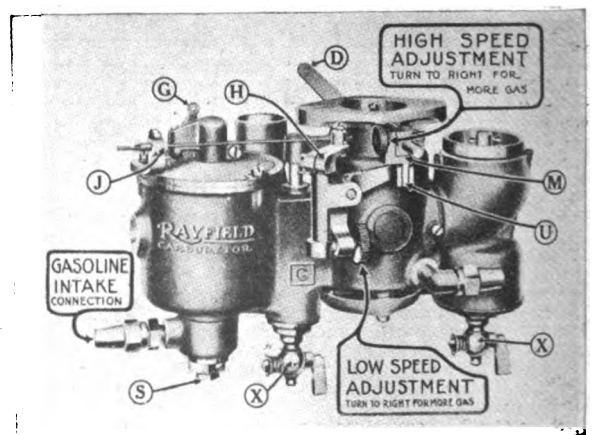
View of Exterior of Rayfield Model G Carburetor, Showing Adjustment Components.
